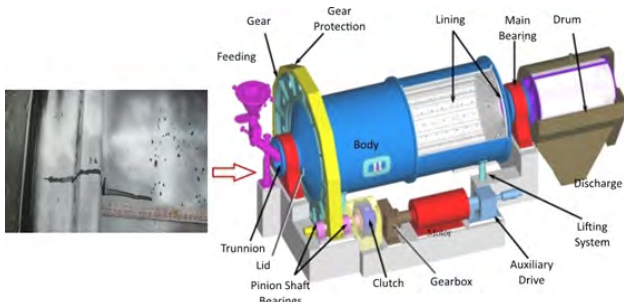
Cracks in trunnion of grinding ball mill.
